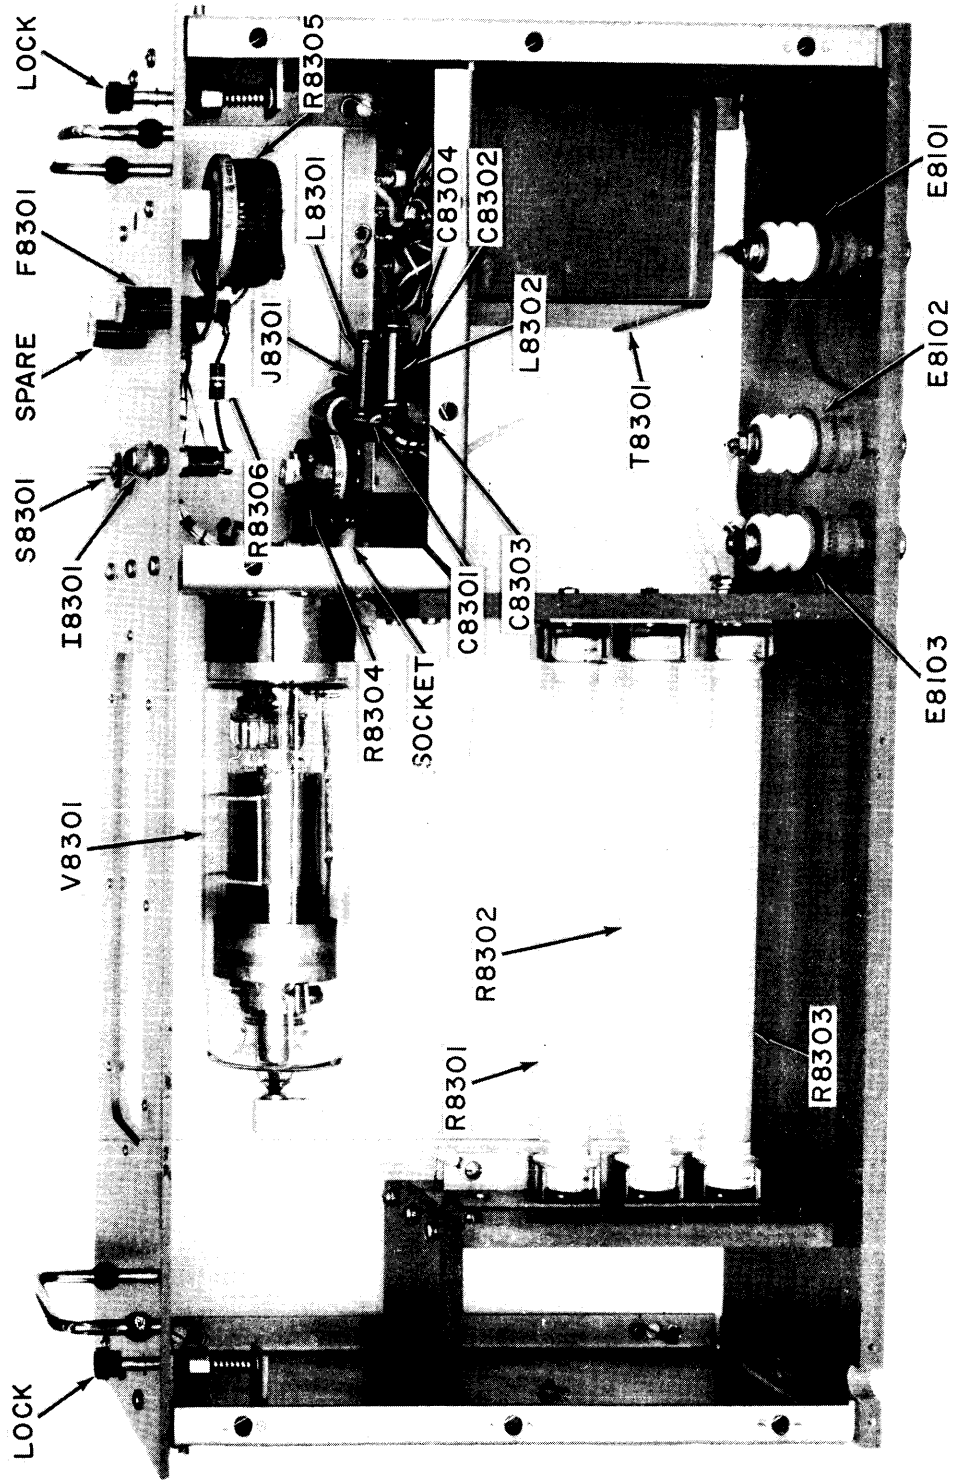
Top View with Callouts, Crowbar Drawer, GPT-40K
